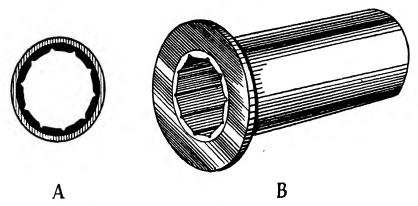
Typical Rubber Bearing for Underwater Use A—End section. B—Perspective view.
